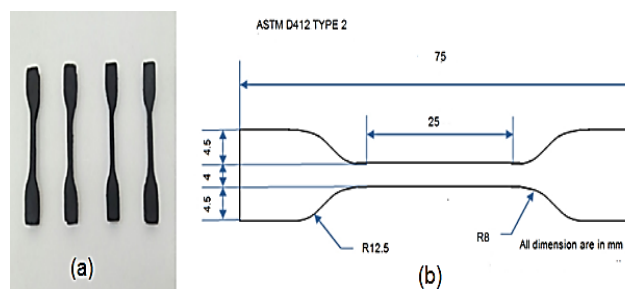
Samples of tensile test: (a) image of Dumbbell-shaped specimens used; (b) Dumbbell-shaped specimen dimensions.
